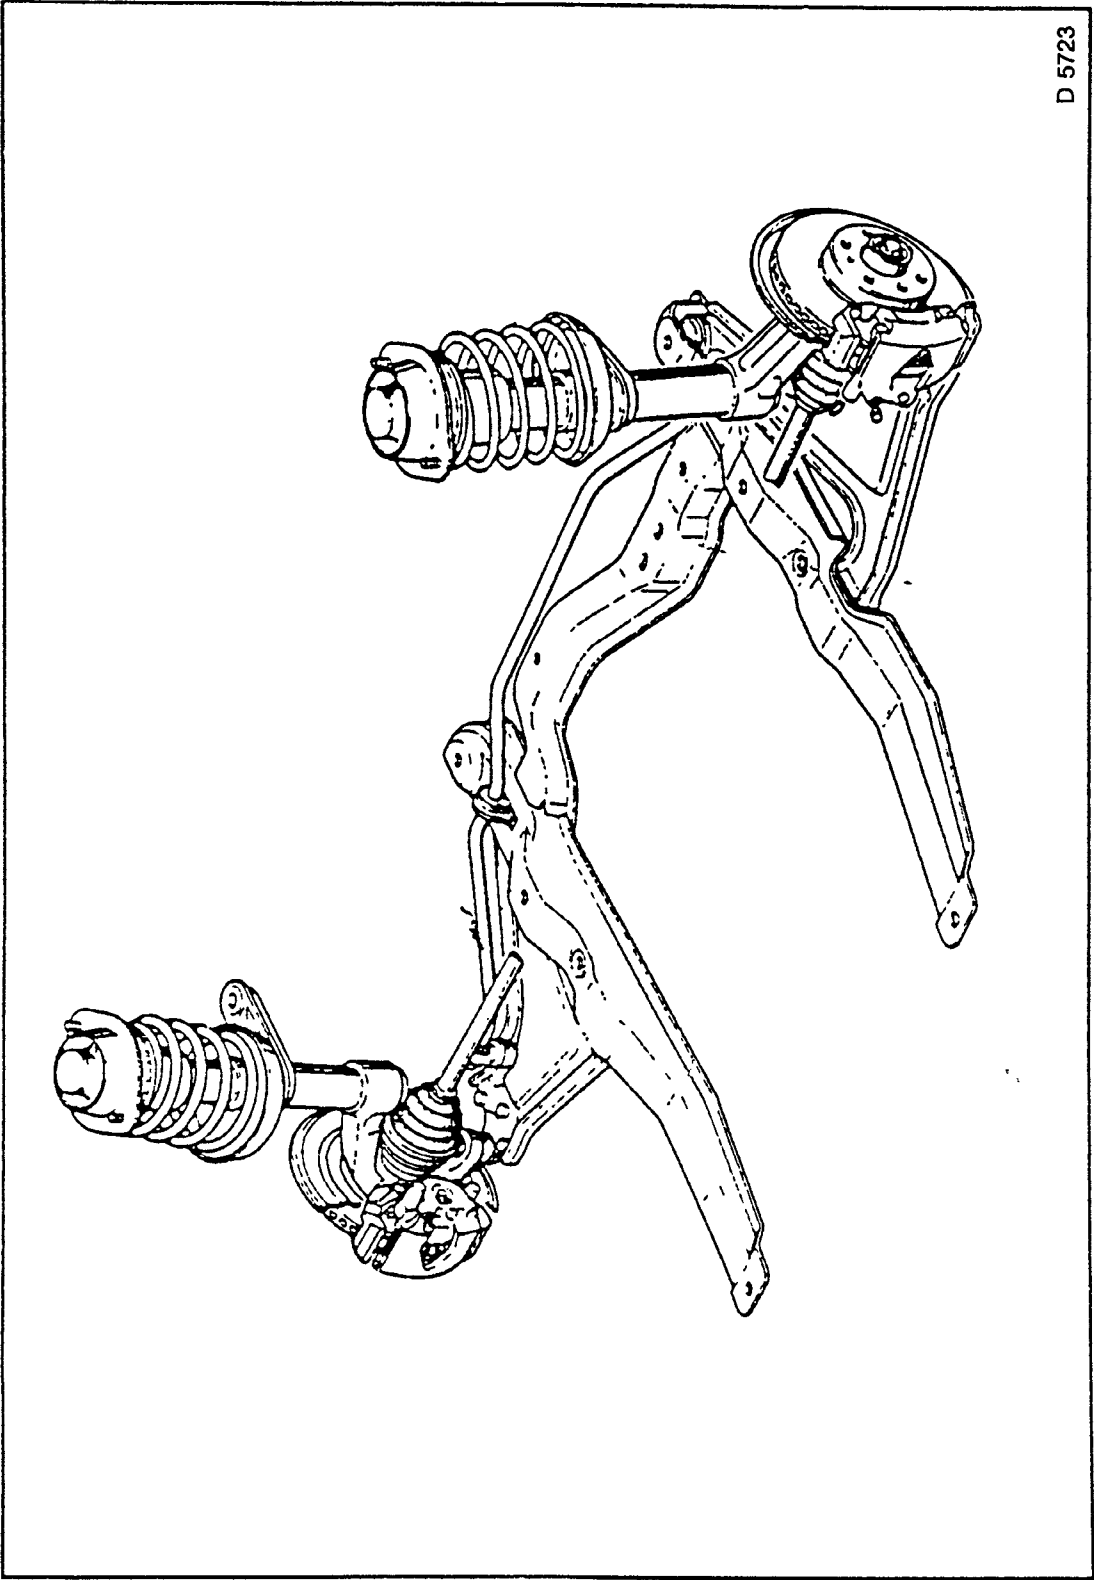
VEHICLE FRONT — MOUNTING POINTS
